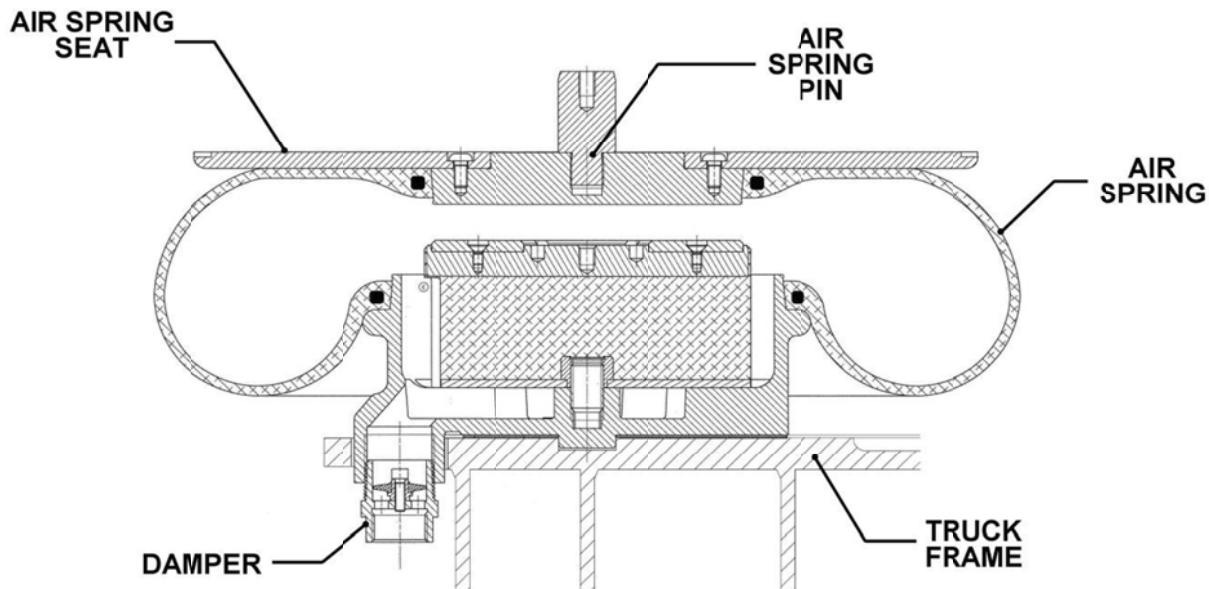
MOTOR TRUCK AIR SPRING PIN
